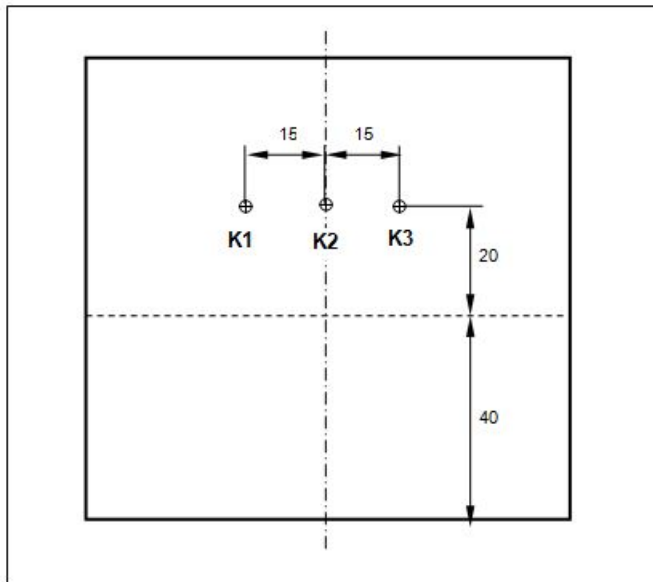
Disposition of thermocouples: K1 = glued on surface; K2 = screwed; K3 = glued in previously drilled hole
